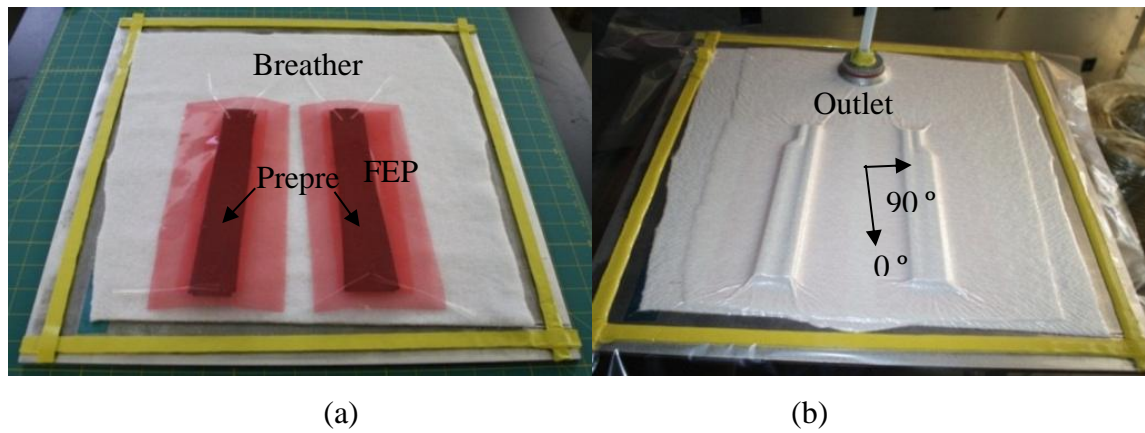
The manufacturing process of composite blades using carbon prepreg (a) out of autoclave setup process (b) vacuum bagged for curing
